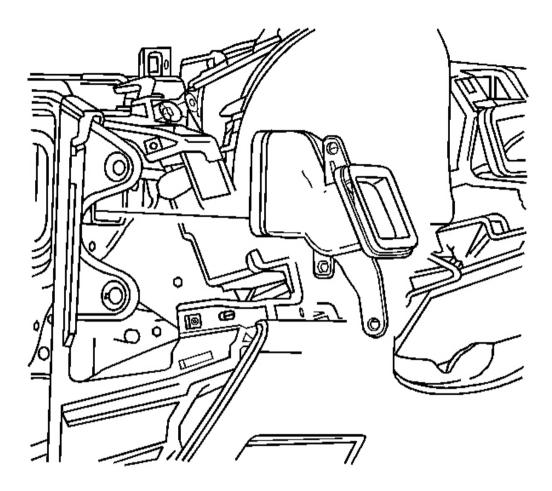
LH Air Outlet Duct & Screws Courtesy of GENERAL MOTORS CORP.
